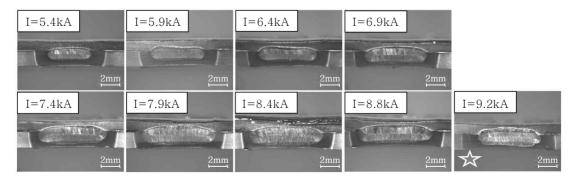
Nugget macrographs with weld current for perfect fit up sheet combination (Weld Force: 250kgF, Weld time: 14cy)
